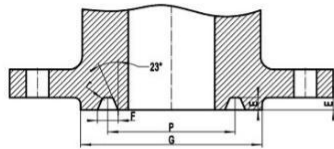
the ASME B16.5 flange with a ring-type joint (RTJ) facing. P – pitch diameter of groove; G – minimum diameter of raised portion; F – upper width of groove; r – radius at bottom of groove; E – depth of groove, equal to height of raised portion; 23°: slope angle of side wall.
